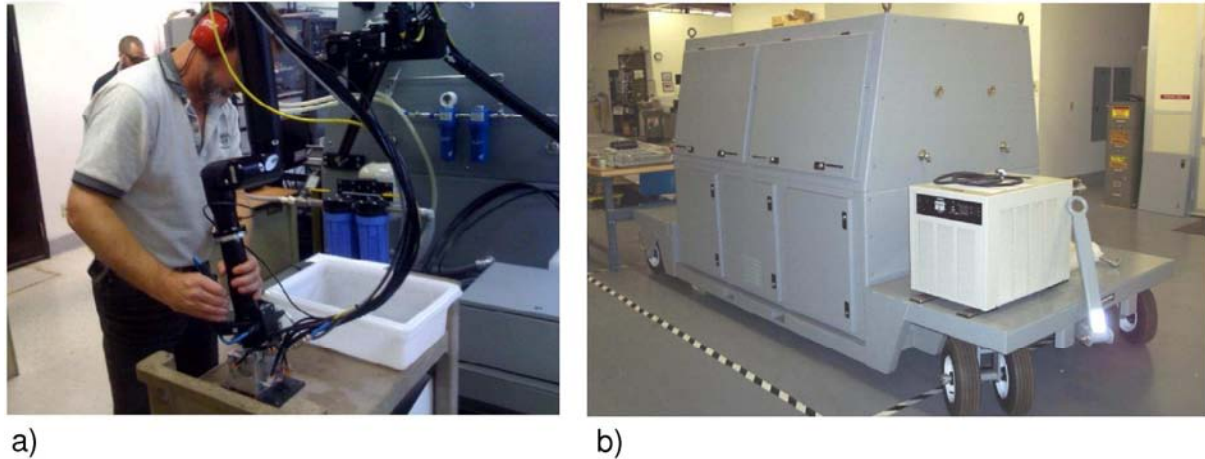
from R. Bossi [93]: Laser bond inspection at Boeing a) Picture of a Boeing fellow in charge of the laser bond inspection testing a composite part b) Picture of the commercial Laser Bond Inspection unit (LBI) developed by LSP Technology
